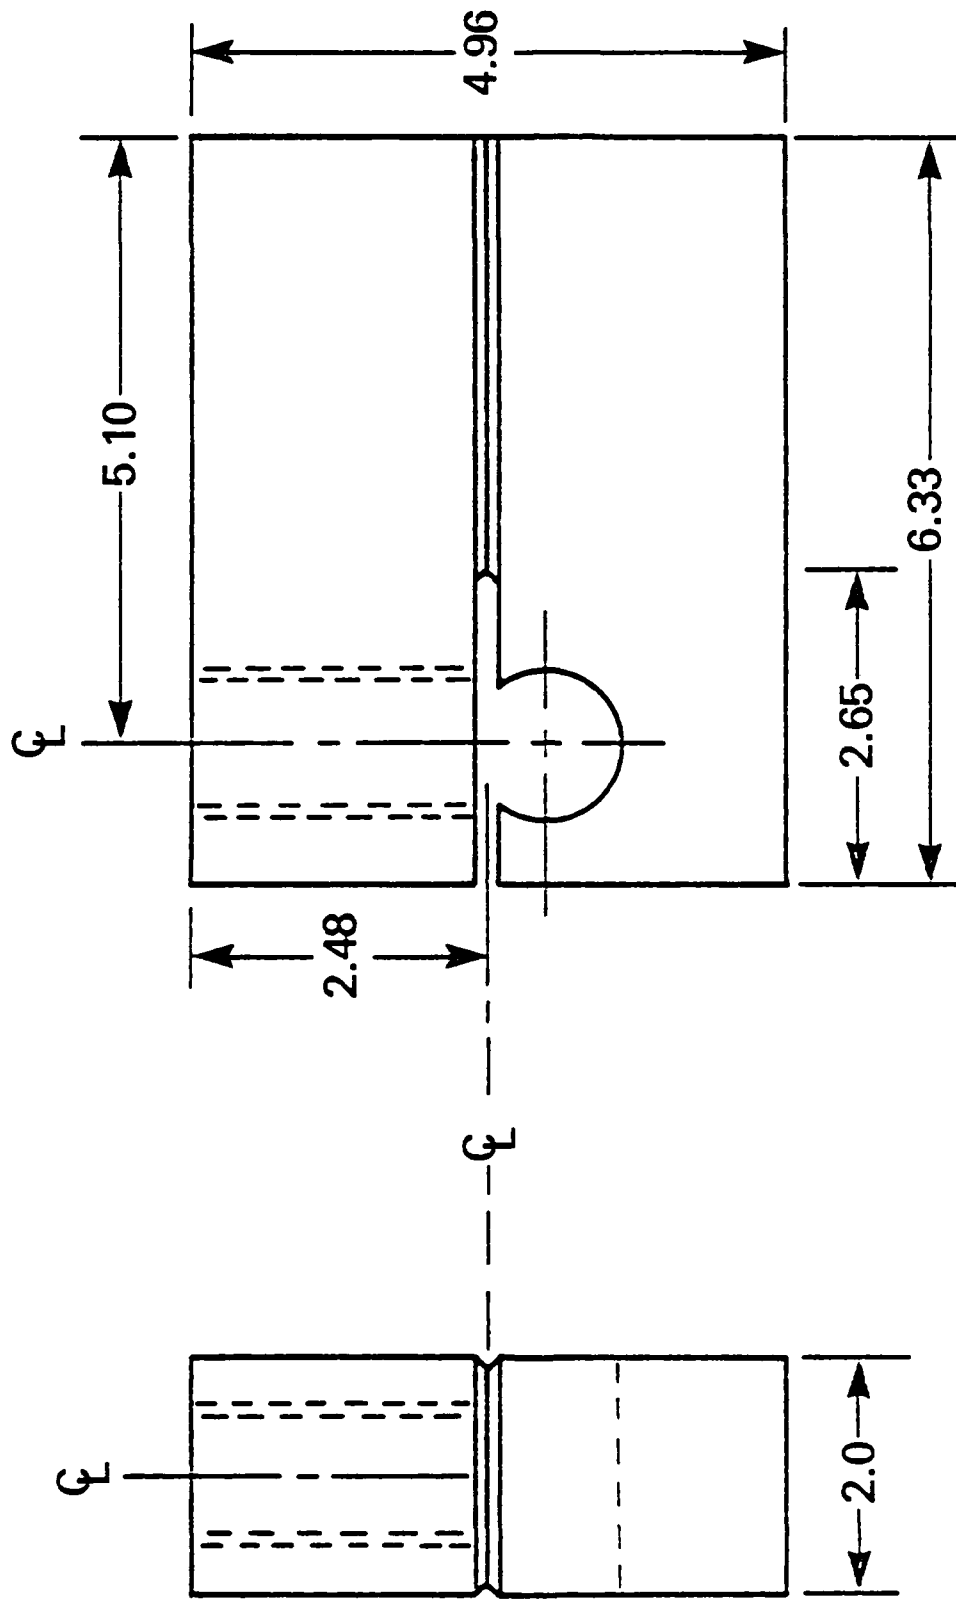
Configuration and dimensions of the 2T bolt-loaded wedge-opening-loaded (WOL) fracture mechanics specimen used for stress-corrosion cracking tests. Dimensions are in inches.
